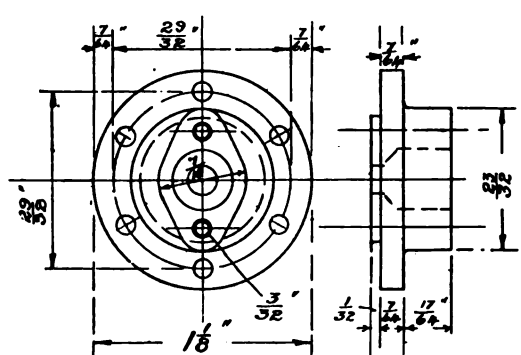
HIGH-PRESSURE BACK CYLINDER COVER.
